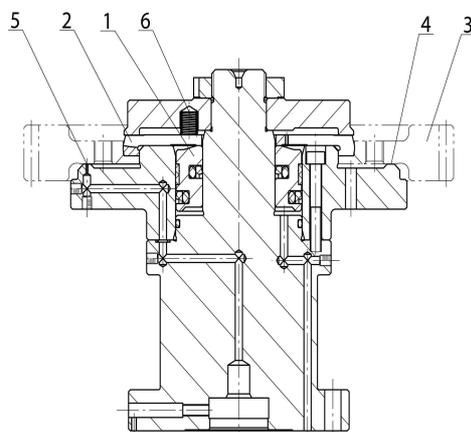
Clamping mandrel for grinding automotive spur gears
